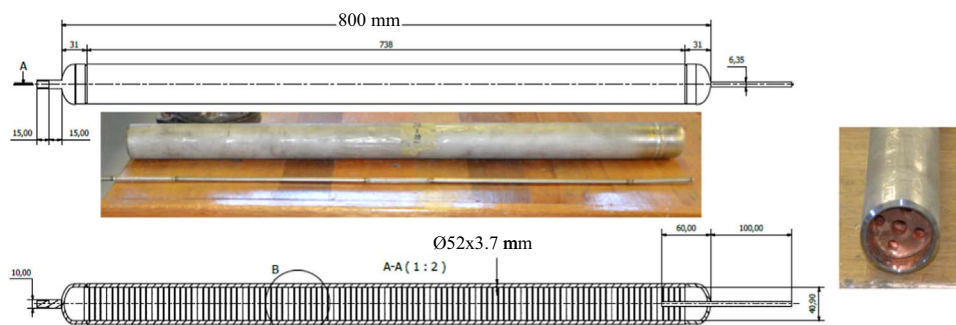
Disassembled view and schematic drawing of cylindrical MH container with external heating/cooling developed by HySA Systems (South Africa) [44].
